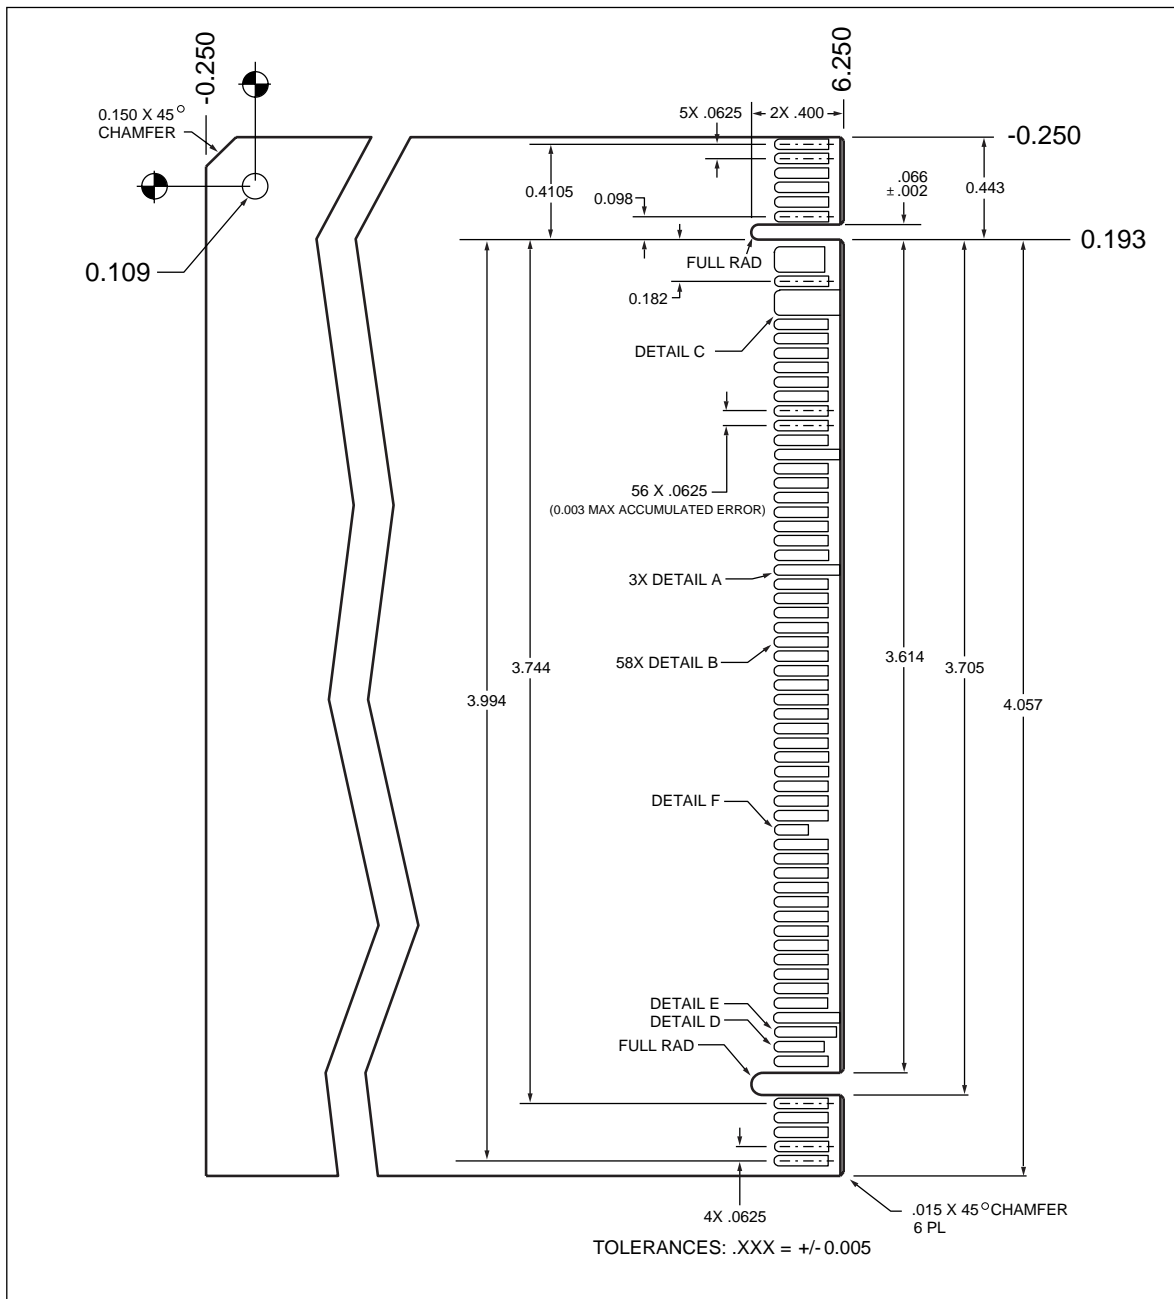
Live Insertion STD 32 P/E Board Fab Drawing (Solder Side).
